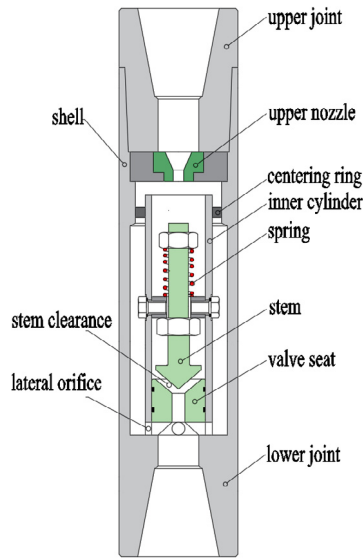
Structure diagram of the valve spring blocking drilling tool.
